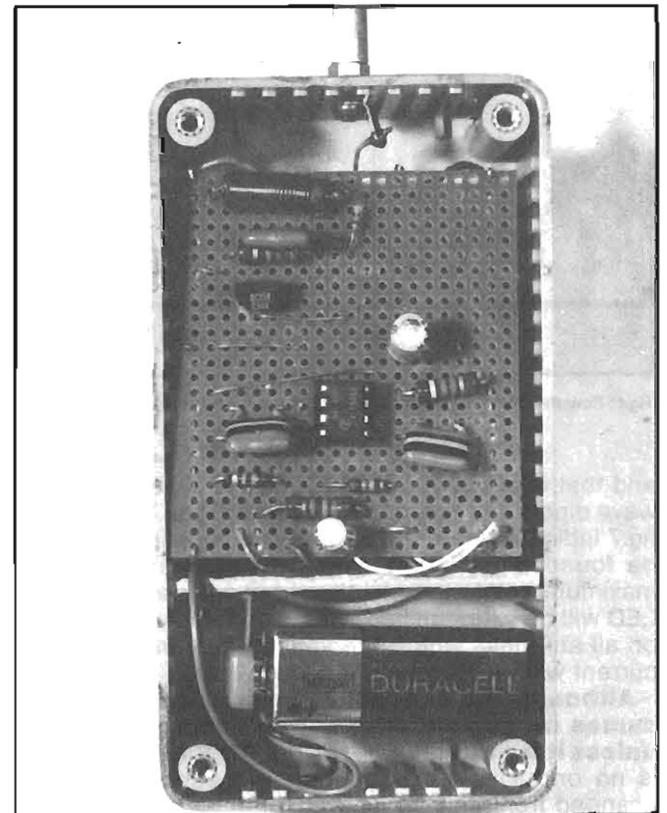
Assembly detail. Circuit board is above loudspeaker.
